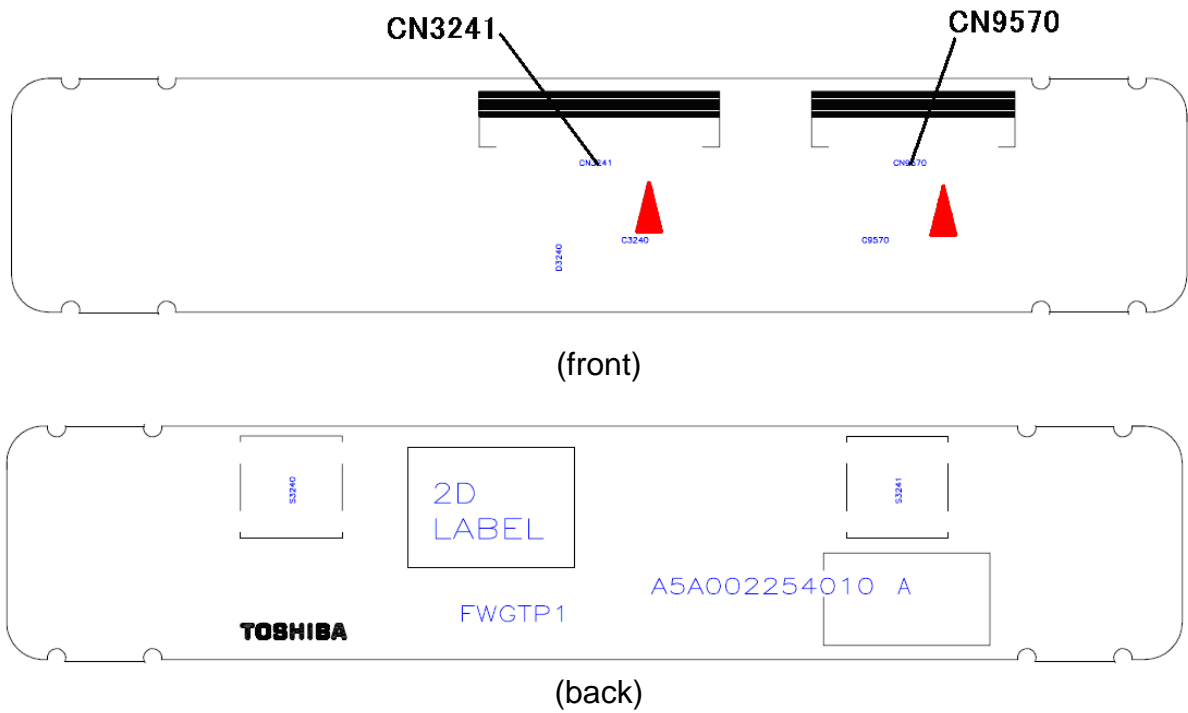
Touch Pad board (FWGTP*) layout (front/back)
